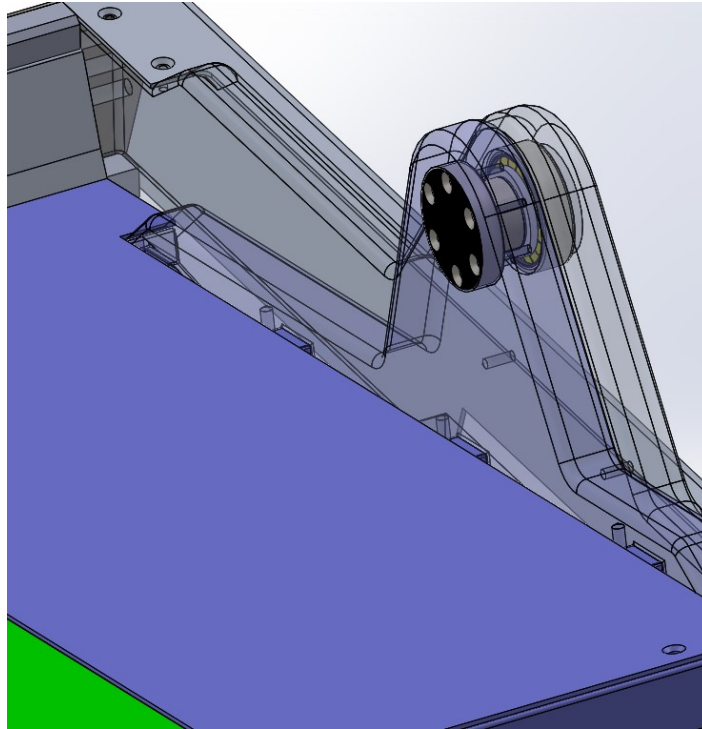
AP Rotation Axis, Supported by Pins & Bearings
